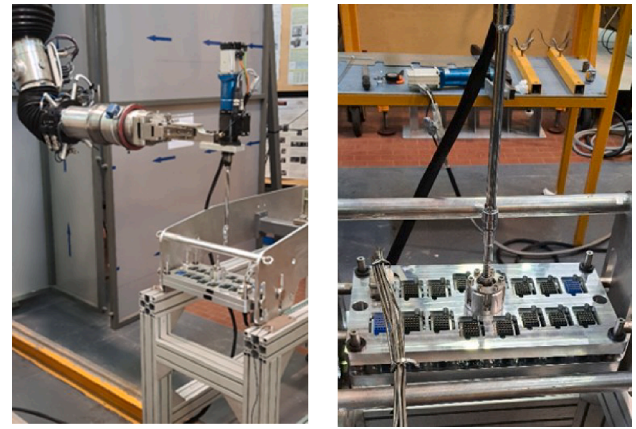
Remote tightening operation of the multi-connector plates (right) through the bolting tool attached to the DRP robotic manipulator (left).
